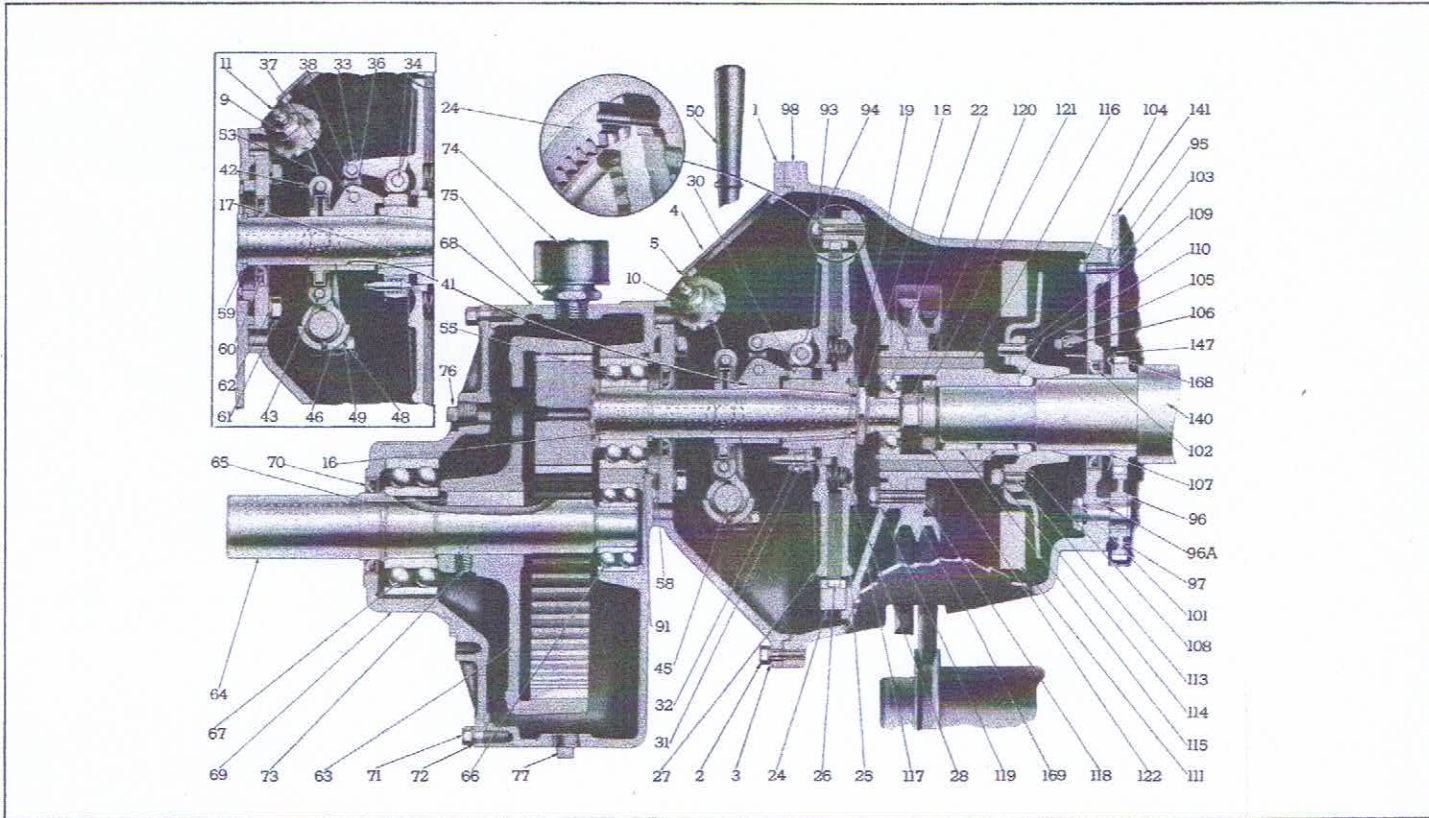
REDUCTION GEAR FRONT END POWER TAKE-OFF ASSEMBLY—MODEL 5168192.
